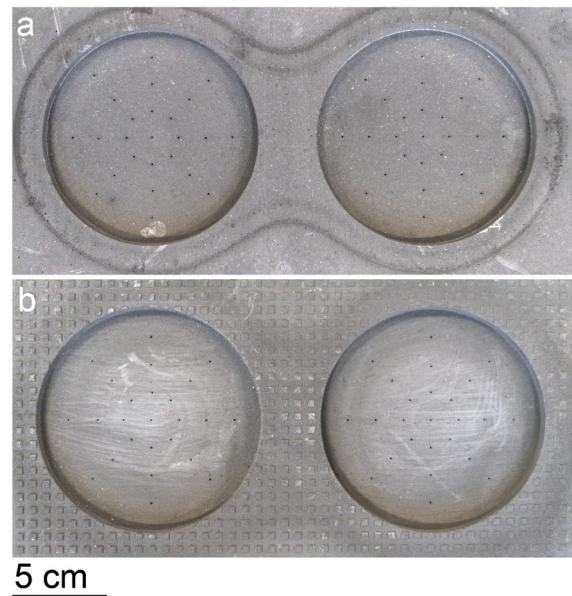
A Machined graphite build plate without additional grid texture applied. The dark outline shows the outside edge of the masonry unit. B Build plate with extra machined grid texture to reduce sliding and prevent dislodging the part from the build plate
